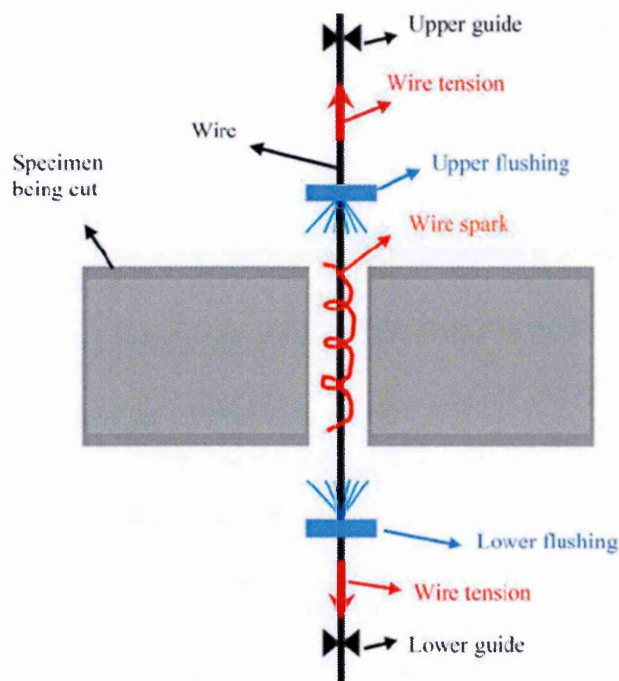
Through-thickness view showing the flushing and wire tension during WEDM process (39).
